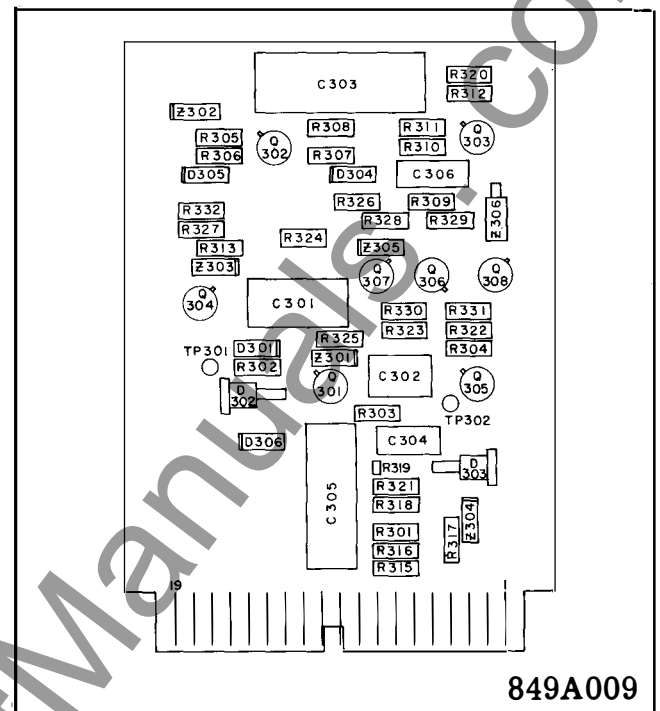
Component Location on Output Printed Circuit Board for Type SKBU Relay
